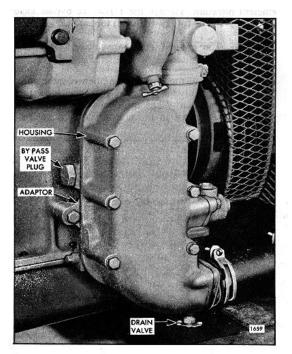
Typical Lubricating Oil Cooler Mounting-Radiator Cooled Engine
